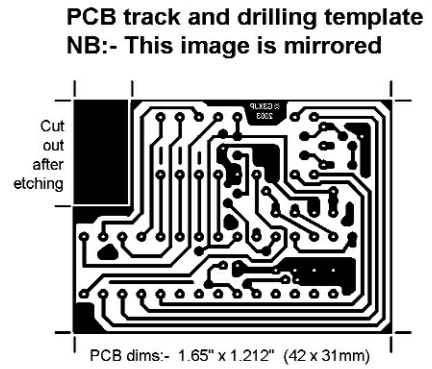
PicAdapter board PCB track and drilling template. NB: This image is reversed
